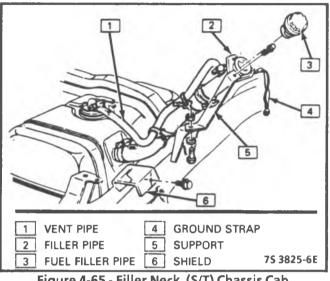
Filler Neck (S/T) Chassis Cab
